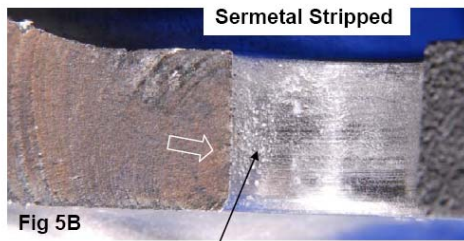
B: Bore surface at fracture origin (arrow) with Sermetel removed which exposed underlying corrosion pitting in base metal.
